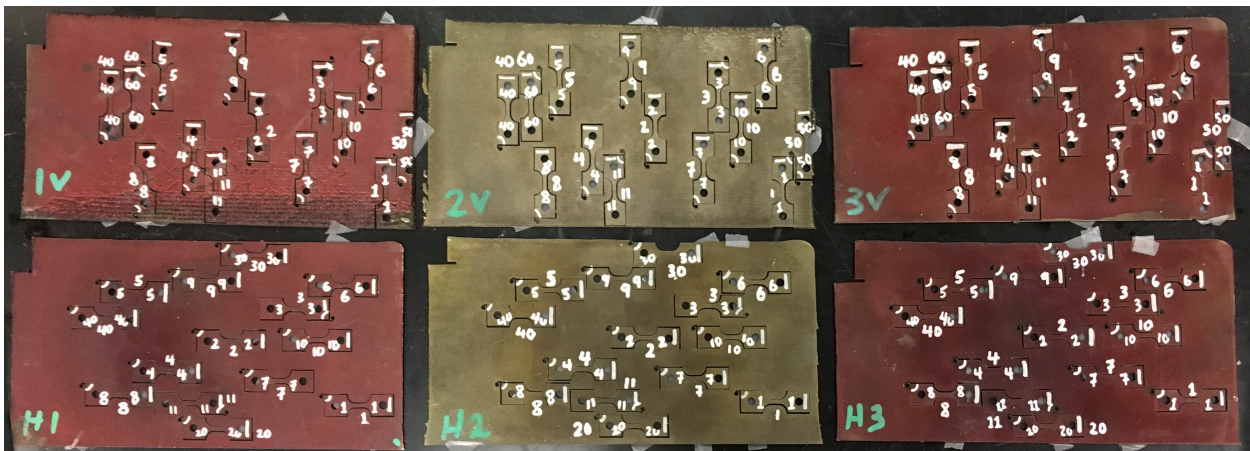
Labeled specimens in their respective thin wall slices prior to testing
